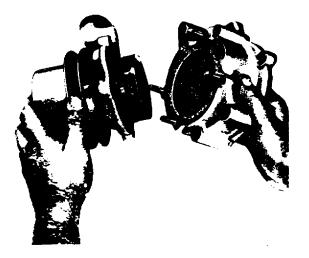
Separating the Front and Rear Pump Body Sections.
